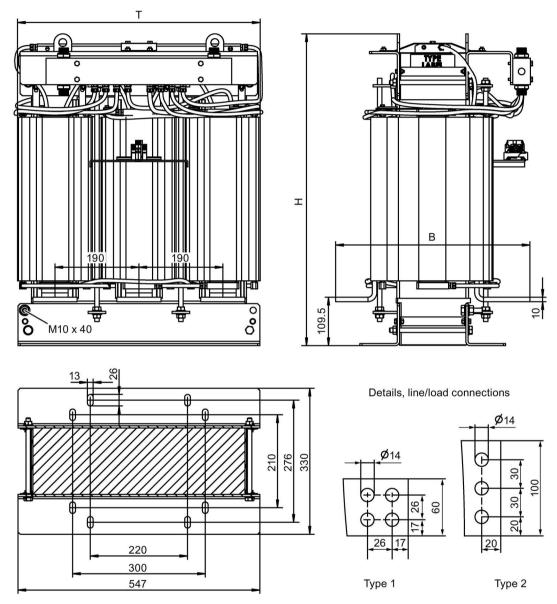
Dimension drawing, filter reactor frame size JIL
